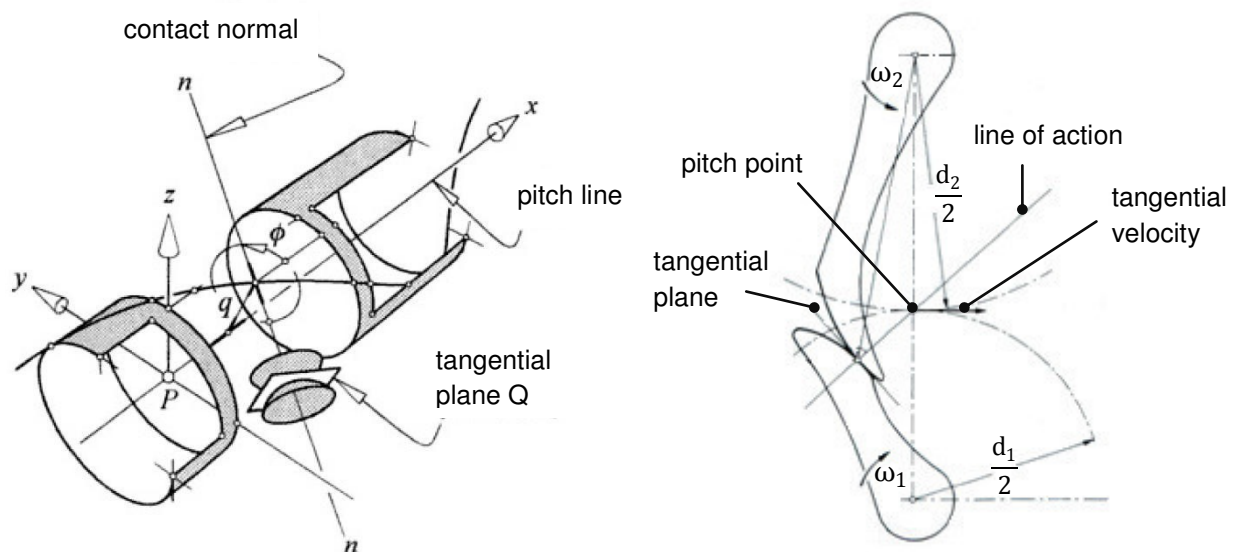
General Fundamental law of gearing (Phillips, 2003, p.42, left) and two dimensional gearing (Niemann, 2003, p.33, right)
